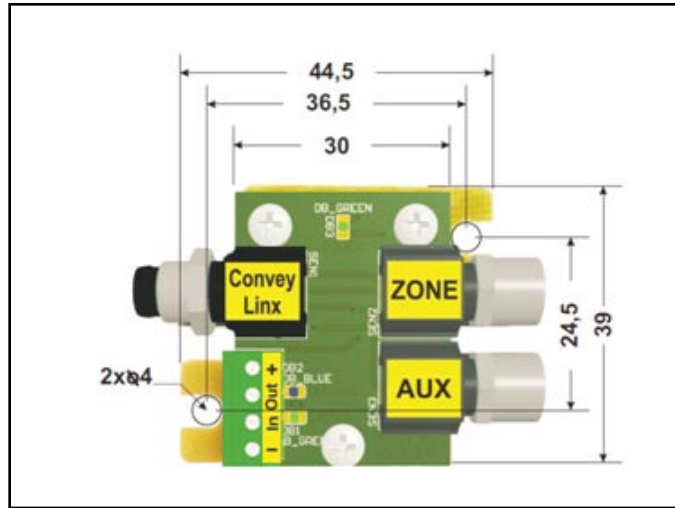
IOX-2 MODULE (DIMENSIONS IN MM)
